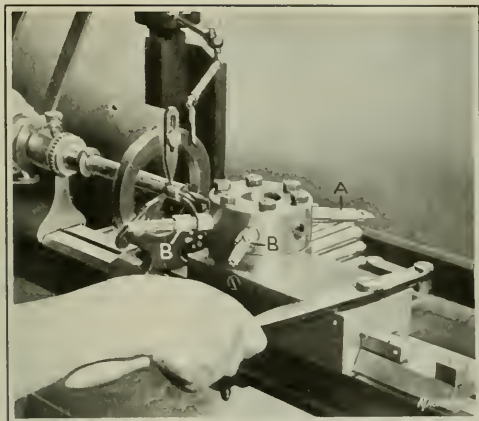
Machining the Taper Hole in Tail-spindles on a Bench Lathe
